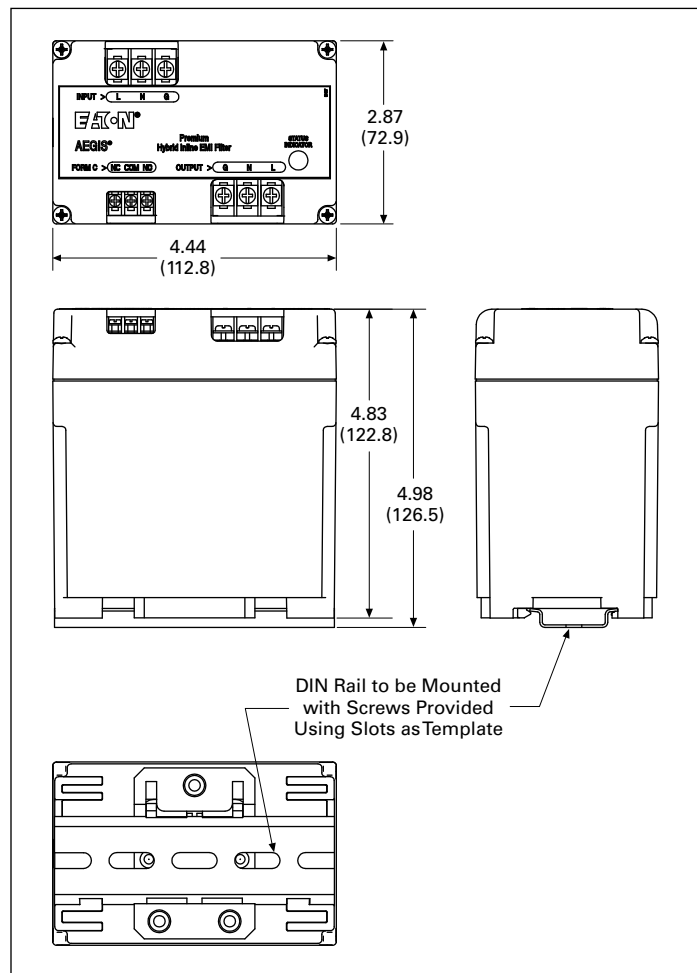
AGPHxxxxx Dimensions in Inches (mm)
